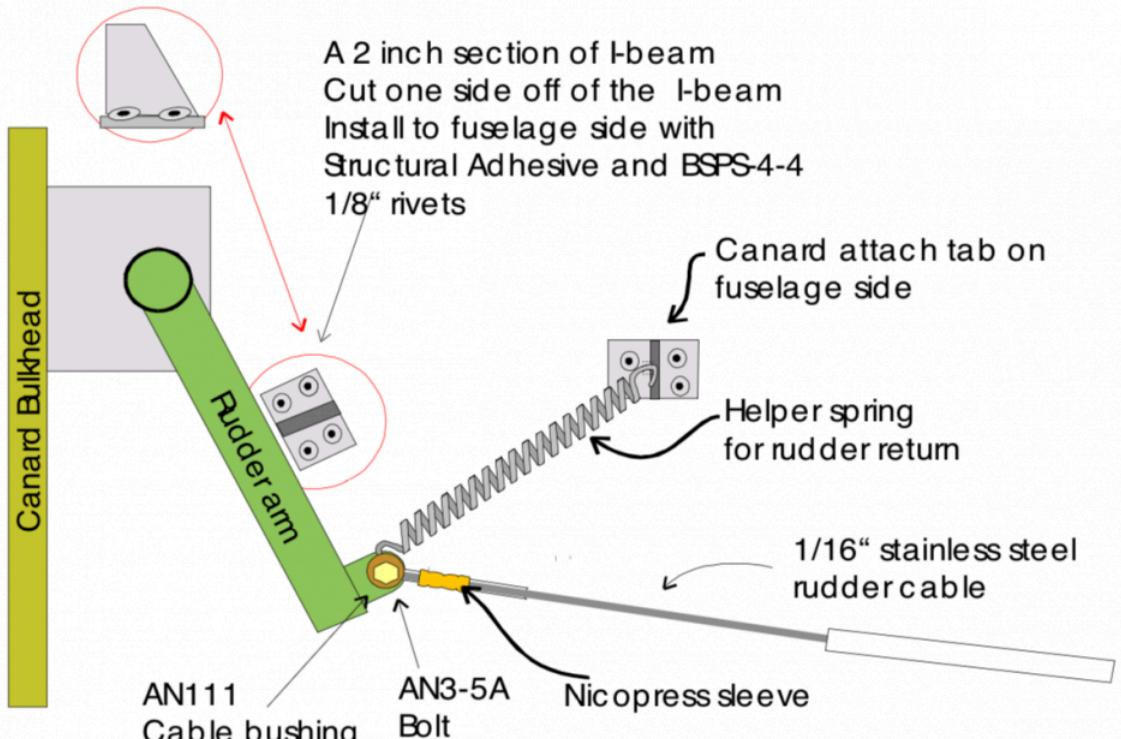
Rudder Cable to Rudder Pedal Attachment
